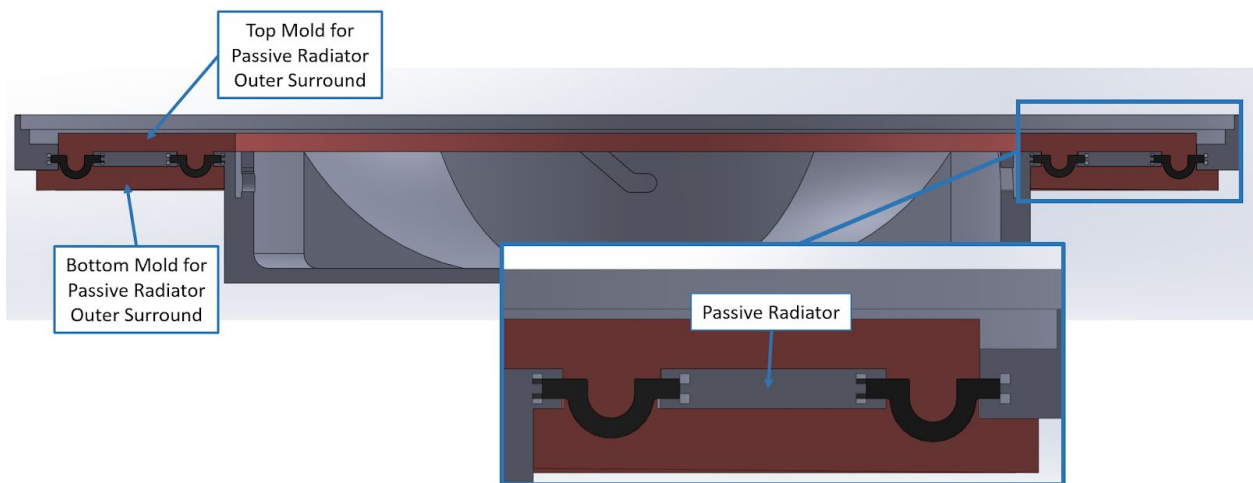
Section View of Molds for Bottom Passive Radiator Surrounds
